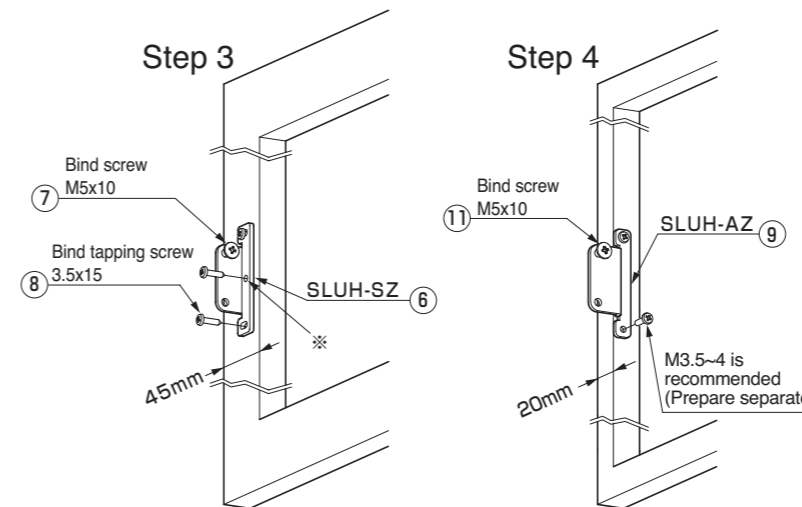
Installation of mounting plate (SLUH-SZ) (for 45mm width aluminum frame door or solid wooden door)
